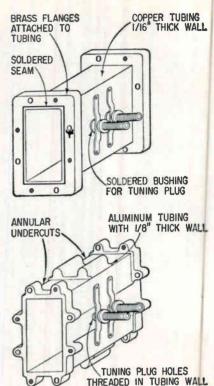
Conventional tubing (top) requires soldered flanges and bushings. Extruded section (bottom) is machined
